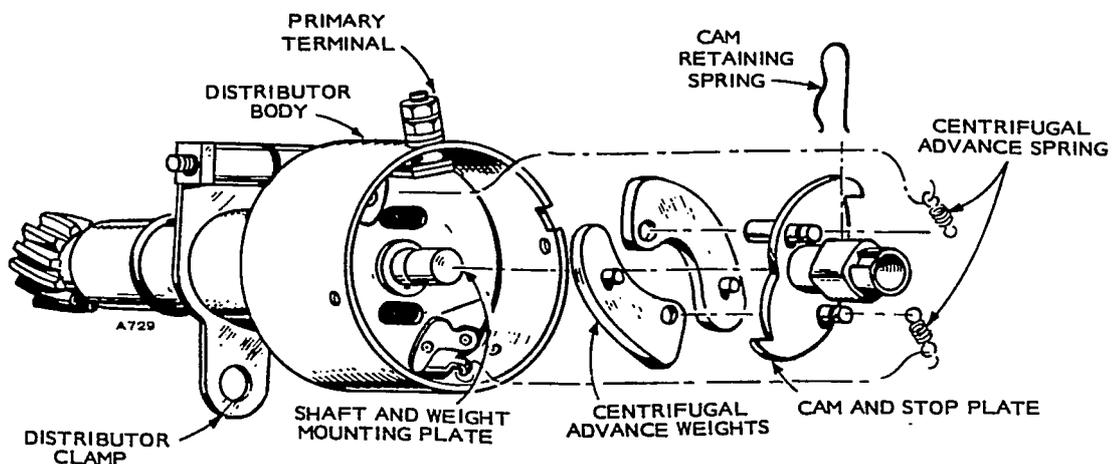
DISTRIBUTOR DISASSEMBLY
